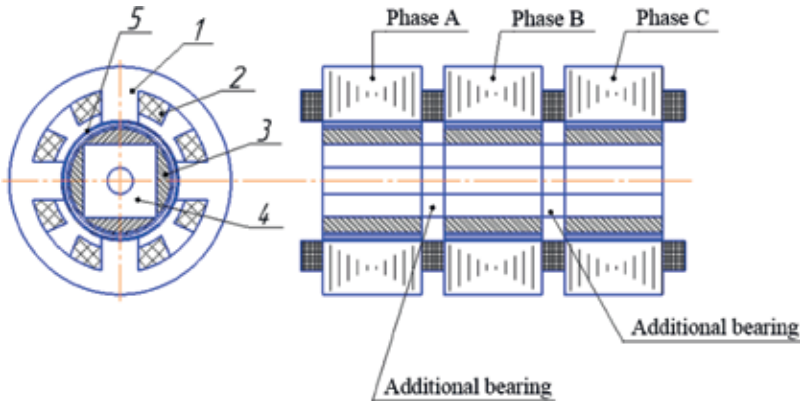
Sectional EM with a tooth-coil winding and a stator core made of AMM: 1 is a stator magnetic core; 2 is a tooth-coil winding; 3 is the HCPM; 4 is a shaft; and 5 is a rotor sleeve.
